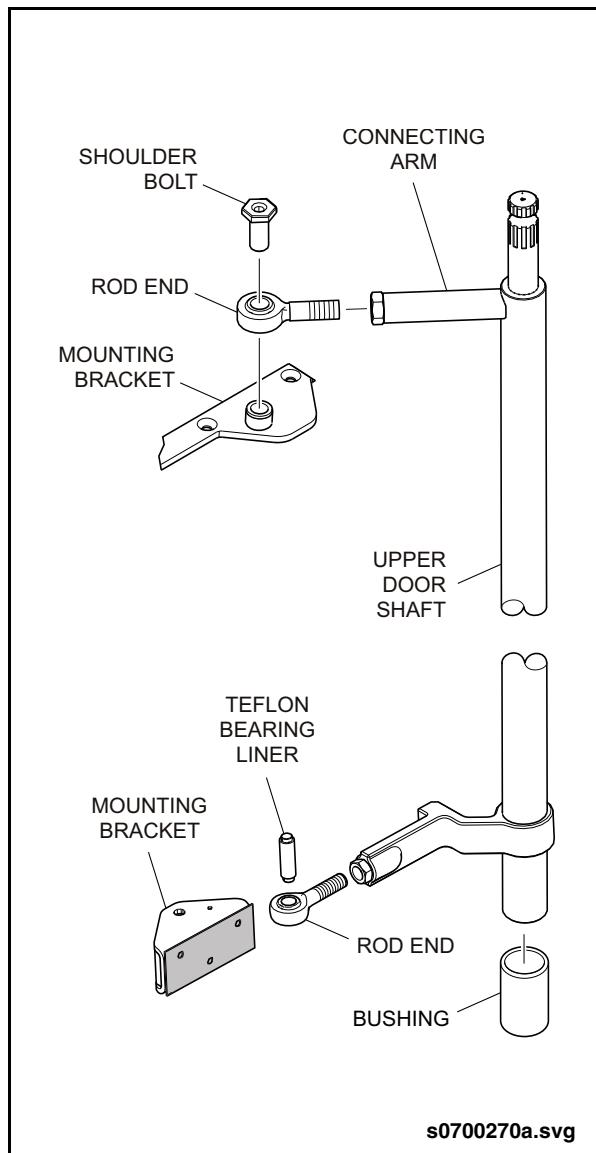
Entrance Door Shaft & Arm Assembly
